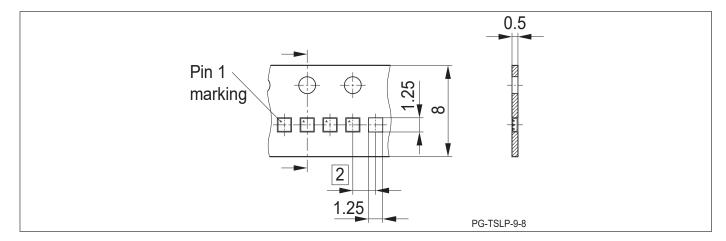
TSLP-9-8 carrier tape drawing (top and side views)
